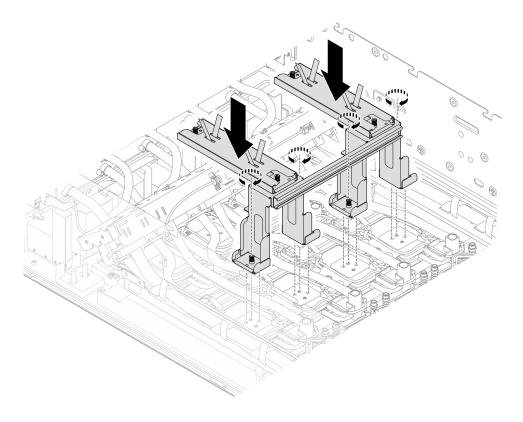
Installing the shipping brackets to the rear GPU cold plates
